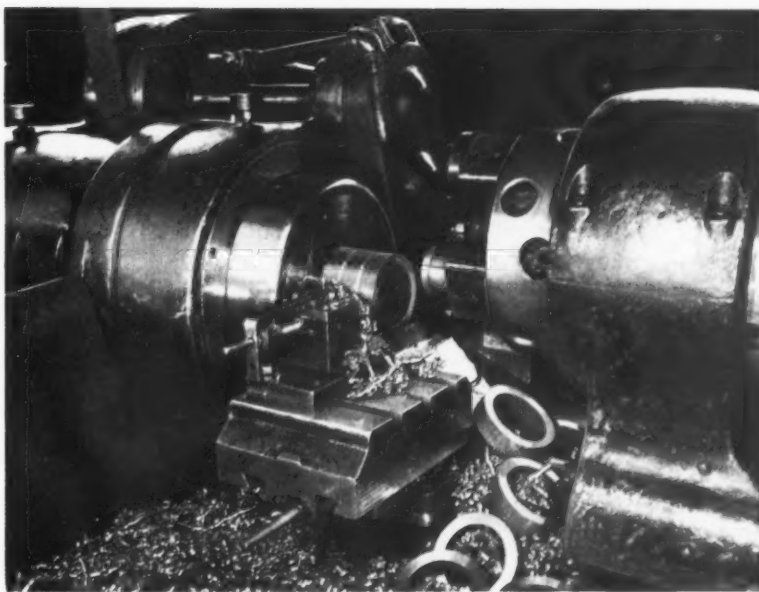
Heavy-duty Single-spindle Bar Automatic Employed for Cutting off Blank Races to be Bored and Turned on Machines Shown in Figs. 3 and 4
